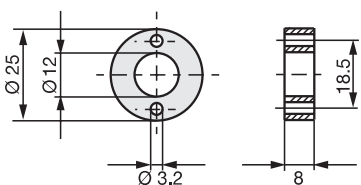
Installation dimensions of BTL-P-1012-4R position magnet
